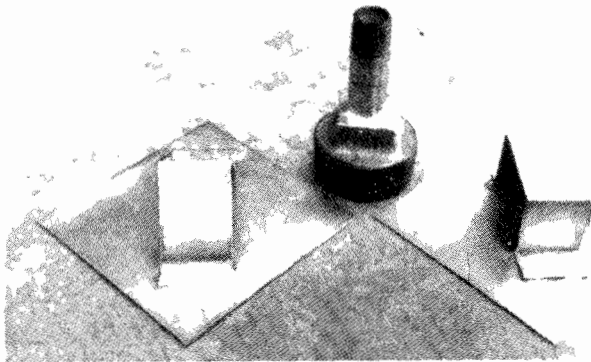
Sheet steel (0.8 mm thick) brazed together and a piece of $\frac{3}{8}$ " pipe braze welded into a $1\frac{1}{2}$ " plug using the twin carbon-arc torch.
